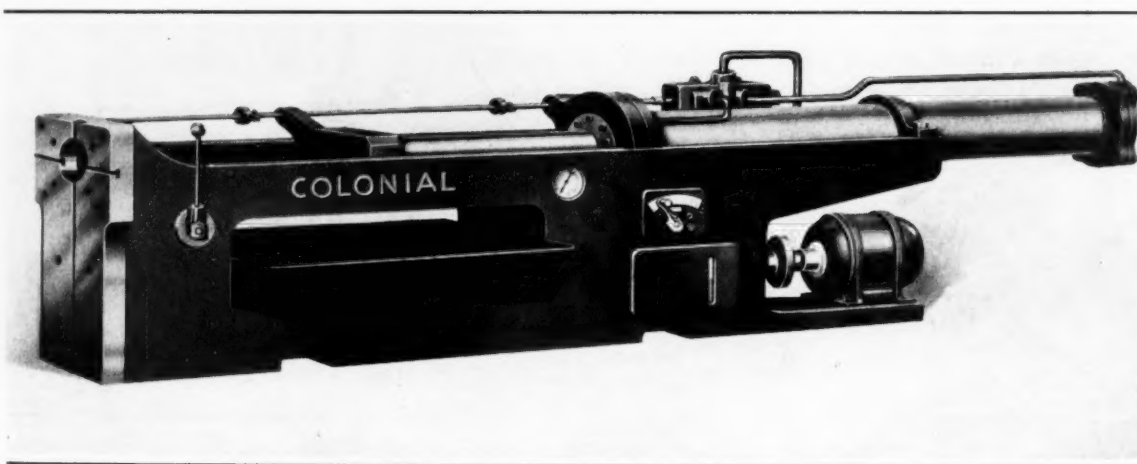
Horizontal Pull Type of Machine Designed for Both Internal and Surface Broaching
